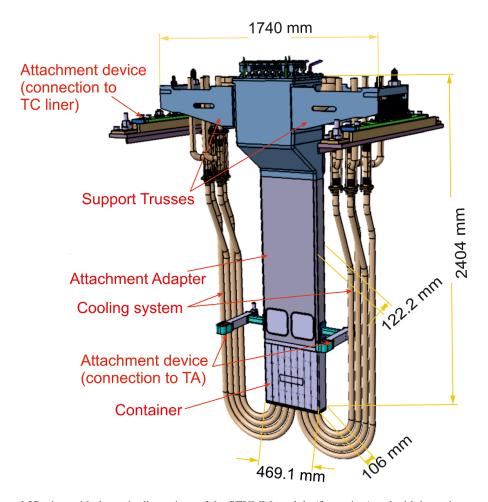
General 3D view with the main dimensions of the STUMM module (front view) and with its main components tagged.
